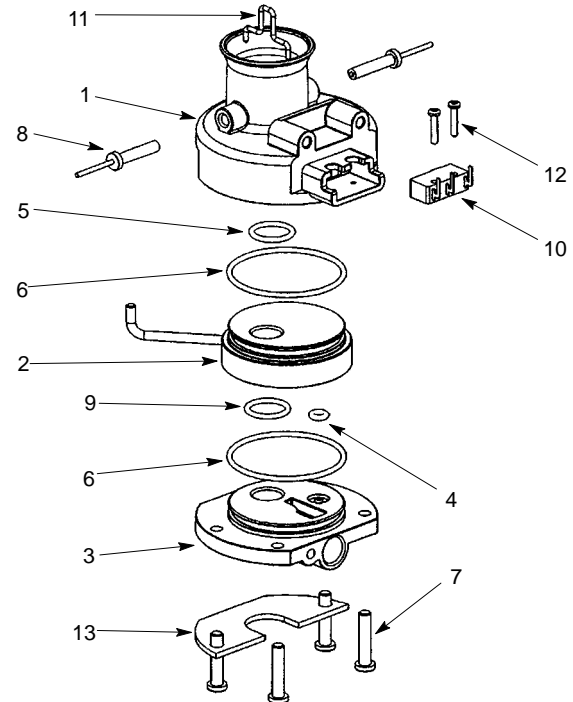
BOTTLE ADAPTER ASSEMBLY
